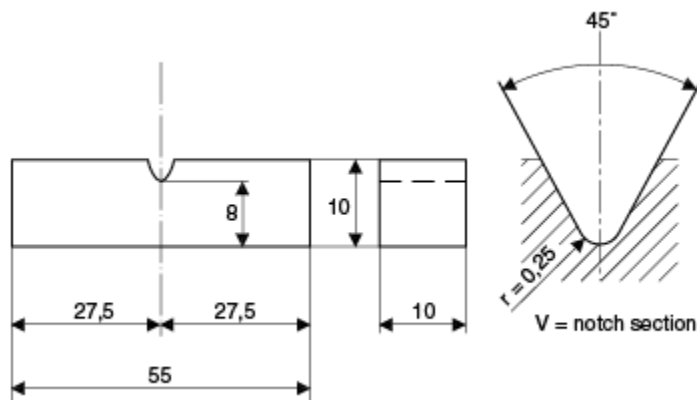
Charpy V- notch specimen with standard dimensions.
